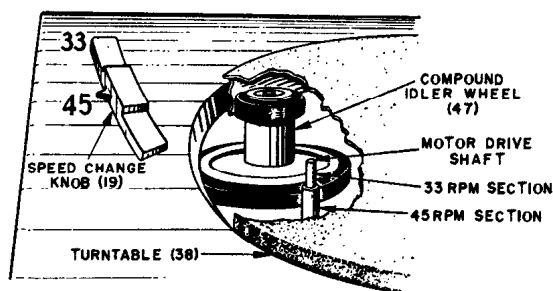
Compound Idler Wheel and Motor Drive Shaft.
